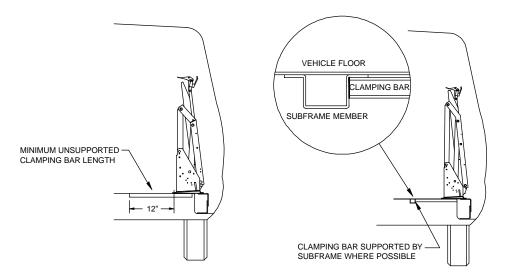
VAN CLAMPING BAR ARRANGEMENT
